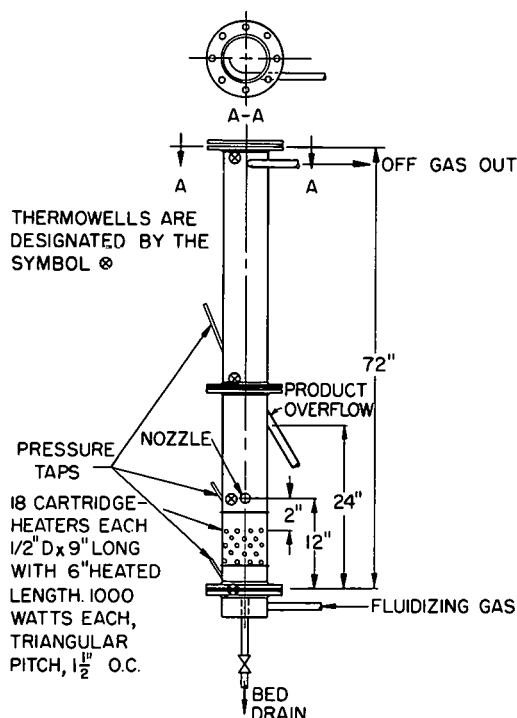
Final Version of Six-Inch Fluidized Bed Calciner Vessel
